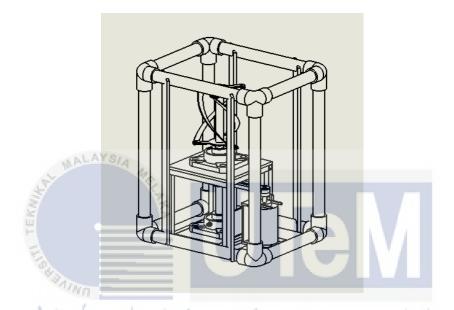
SolidWorks Drawing of Vertical Model of Wind Turbine with Barrier Assembly
